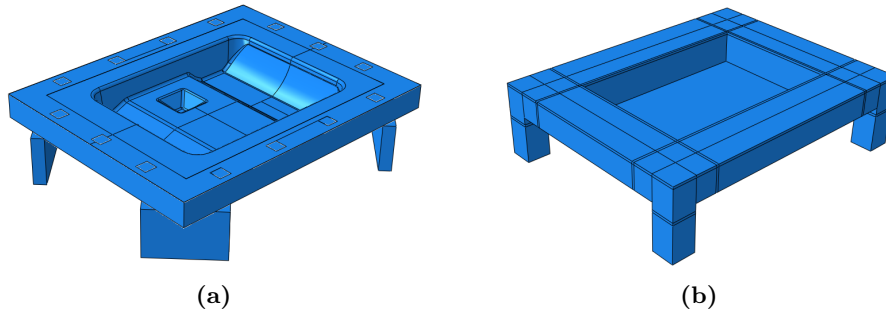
CAD view of (a) Part-Frame assembly and (b) simplified geometry
